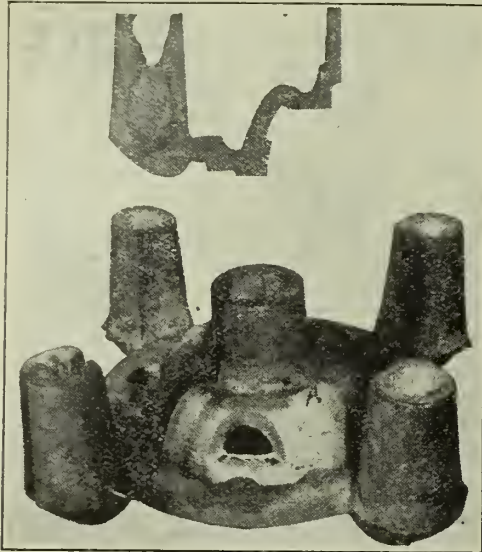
AN EXAMPLE WHERE RISERS WEIGH MORE THAN THE CASTING.
